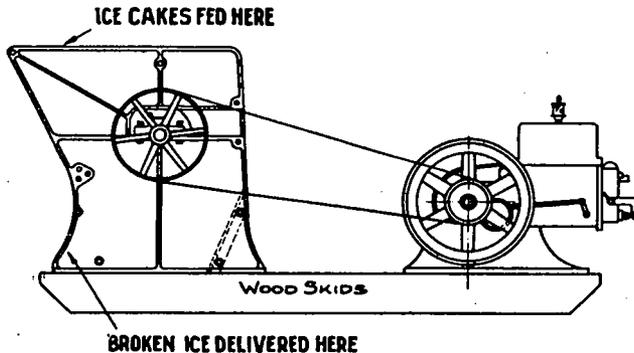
Arrangement of ice breaker driven by gasoline engine. Courtesy, Cochrane Corporation.
